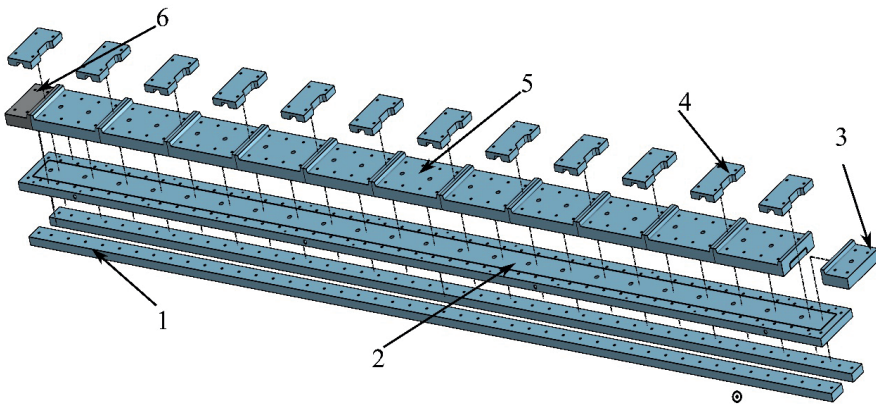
Design version 2 with all new components: 1- stiffness ribs, 2- bottom plate, 3- inlet plate, 4- tie plates, 5- aperture plates, 6 outlet plate.
